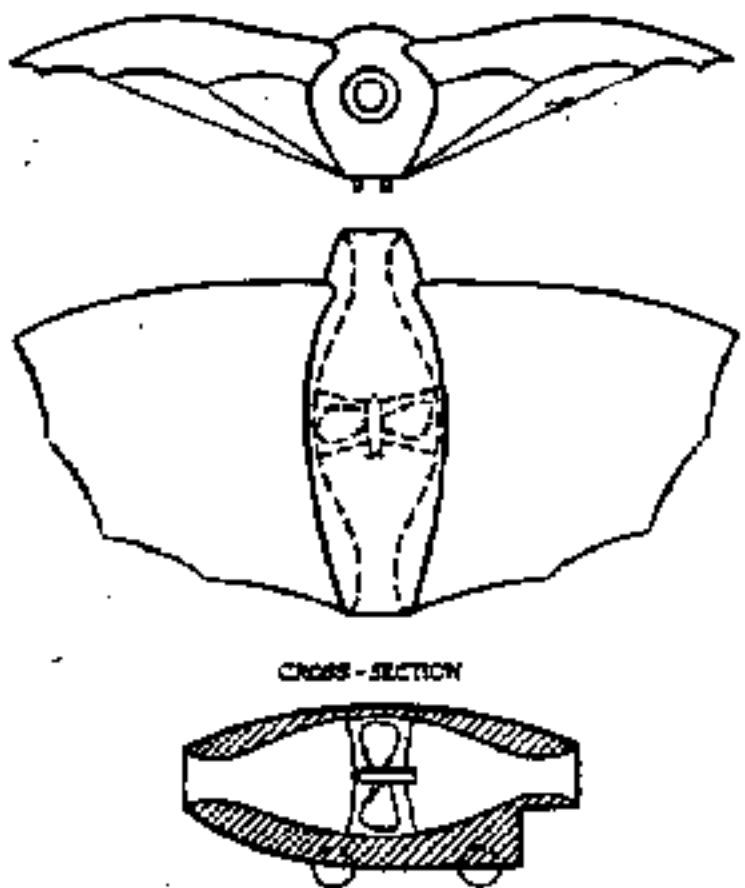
"Turbine flying machine" (project) of the Munich engineer Gustave Koch, 1893/1894. Tailless monoplane of low aspect ratio, propelled by a ducted fan. A 50 h.p. steam engine was deemed sufficient for this flying motor car. The design of the duct shows intelligent anticipation.
